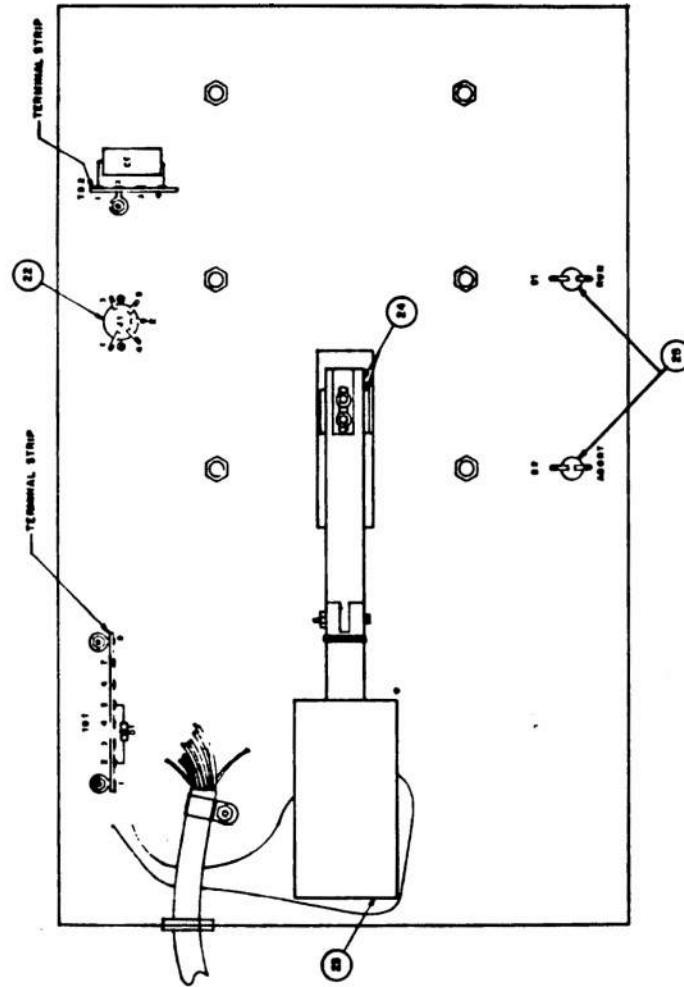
CHASSIS INTERNAL PARTS LOCATIONS
